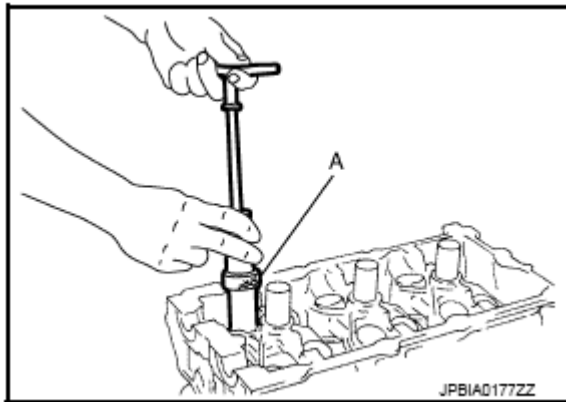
Removing Valve Oil Seal Using Valve Oil Seal Puller
